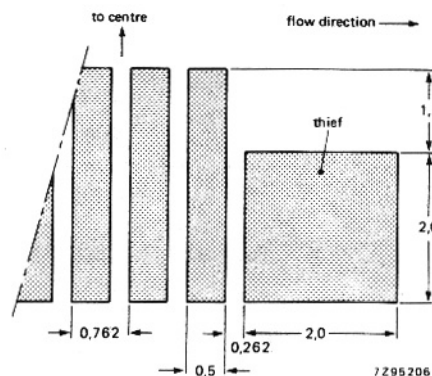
"Solder thieves" are areas in the Cu layer to reduce bridging in wave soldering [6.6].
